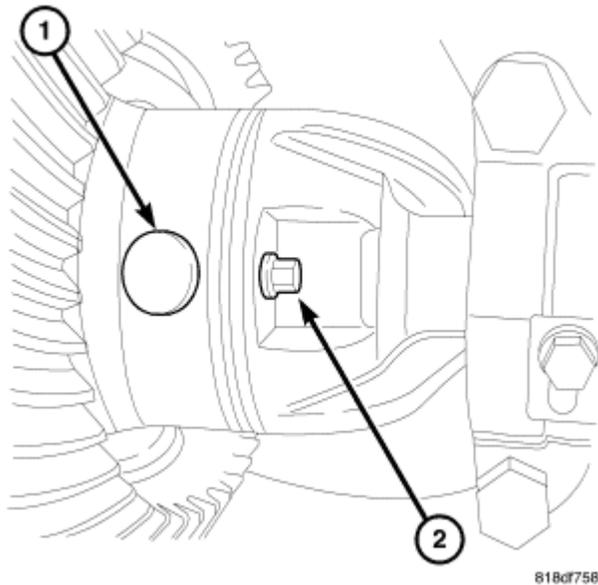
Identifying Pinion Mate Shaft & Lock Screw
